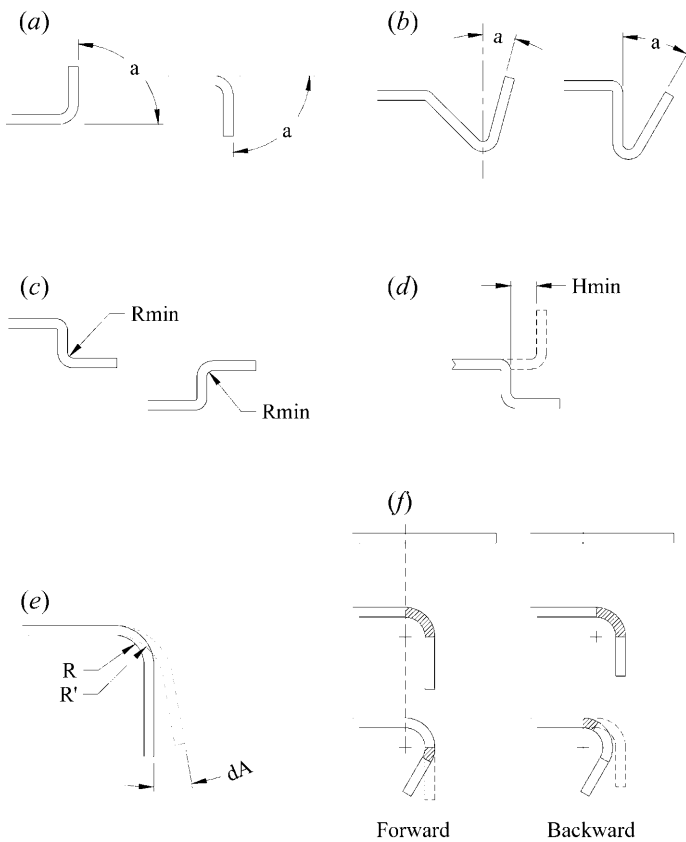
Limitations, springback and completing direction. (a) Max L-bending angle. (b) Min V and Z draft angle. (c) Min Z punch radius. (d) Min offset not to apply Z or V. (e) Springback of angle and radius. (f) Bend completing direction.
